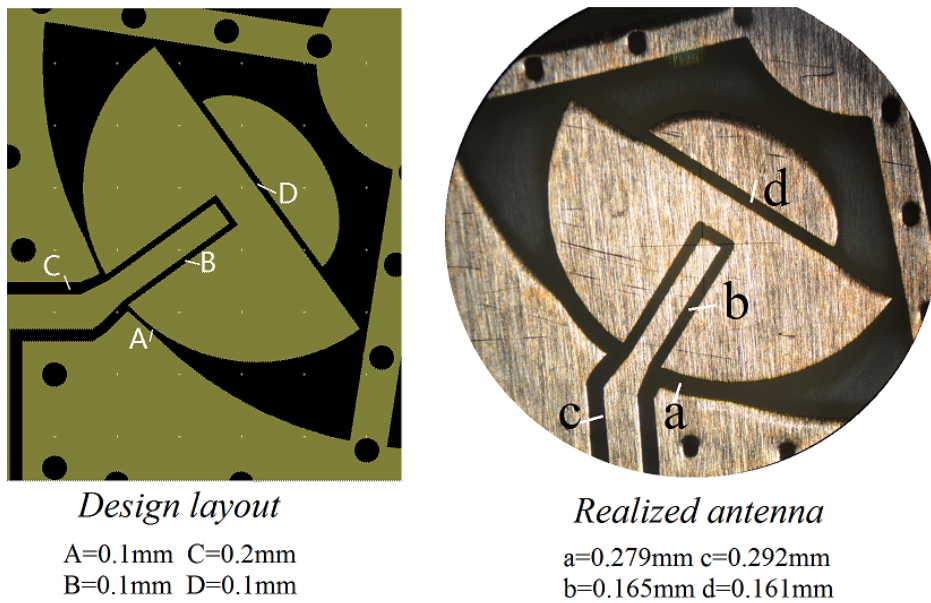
Fabricating tolerance between design layout and achieved antenna board
